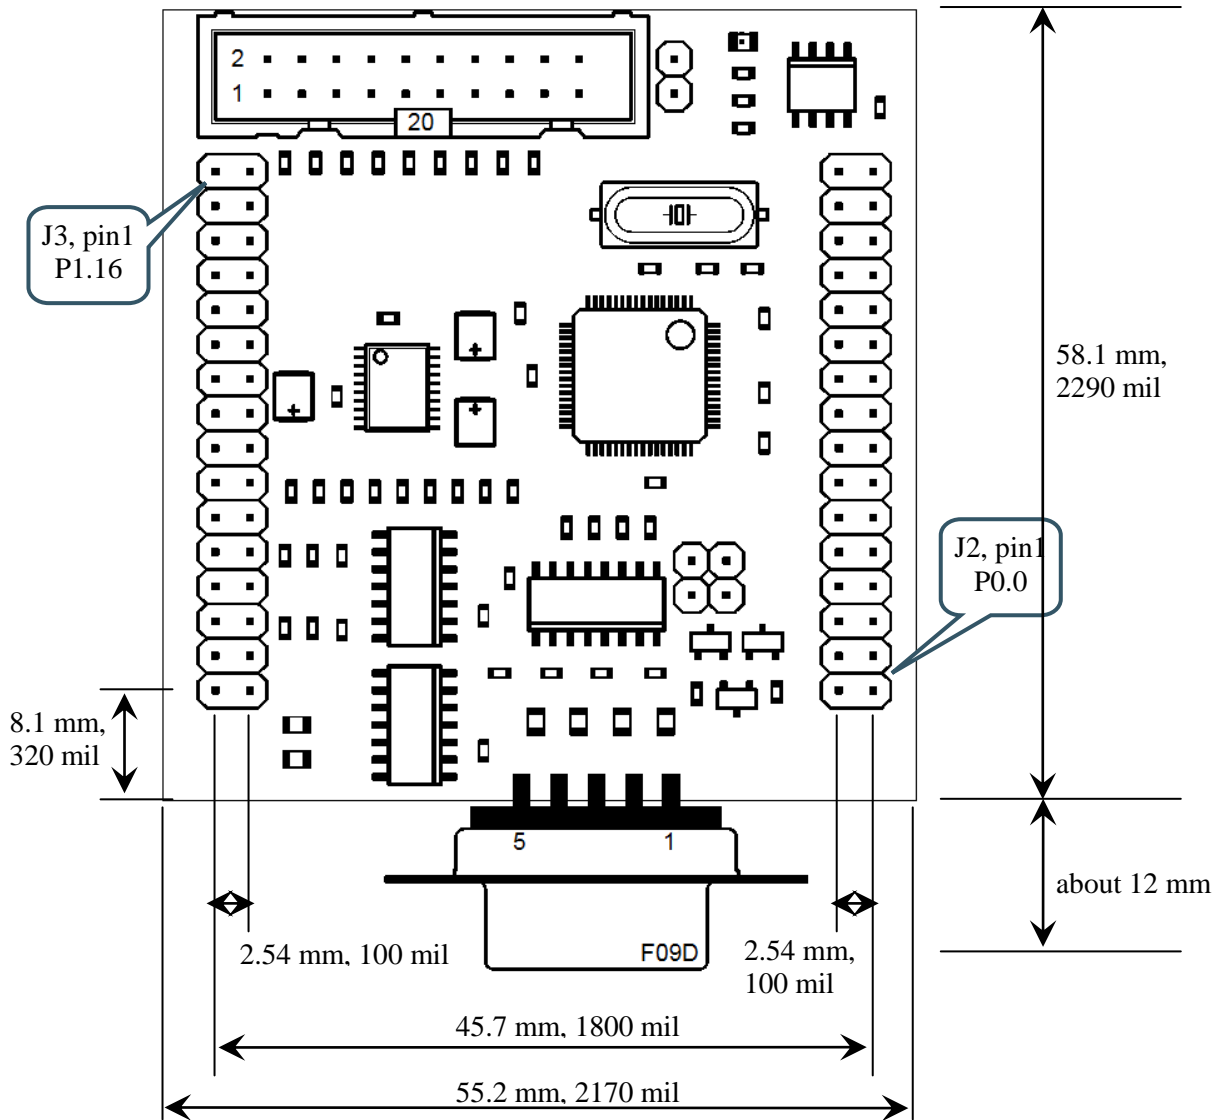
LPC2129 CAN QuickStart Board Mechanical Dimensions
